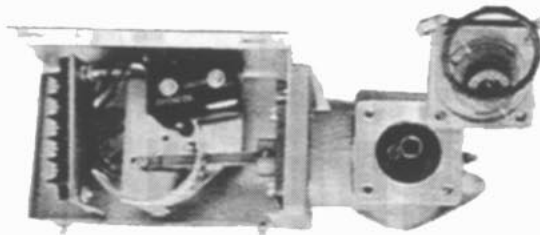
Top view of vane position indicator showing cover plate removed. Crank set-screw (4), crank (3), and crank pin (8) can be seen.
